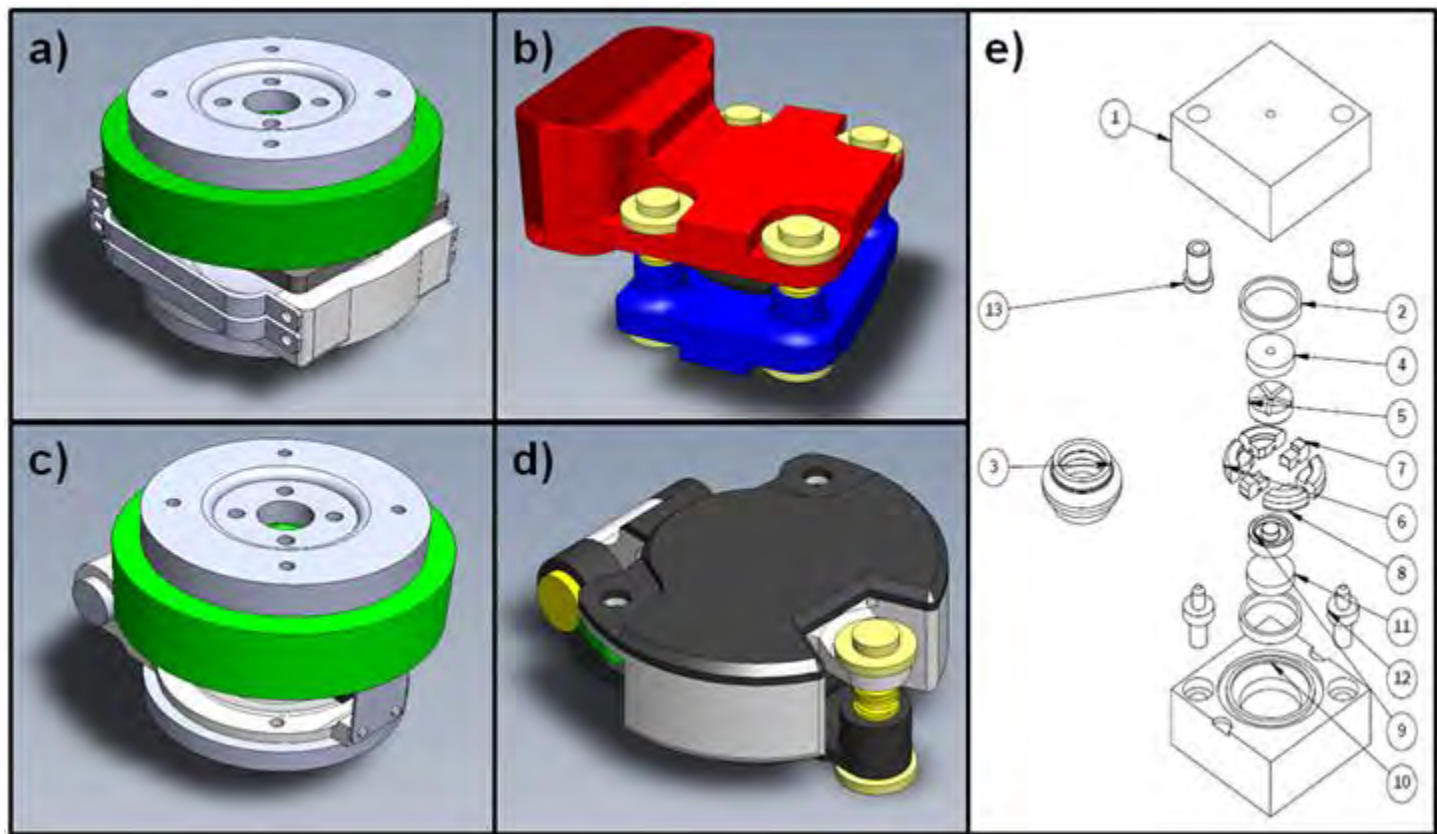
CAD drawings for each hybrid pump design and the bladder mold.
